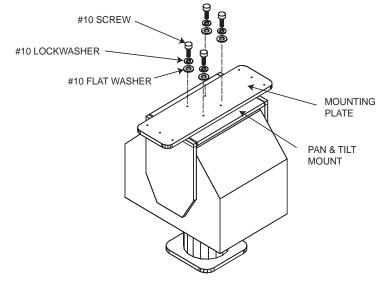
Mounting Plate Attachment to Pan and Tilt
